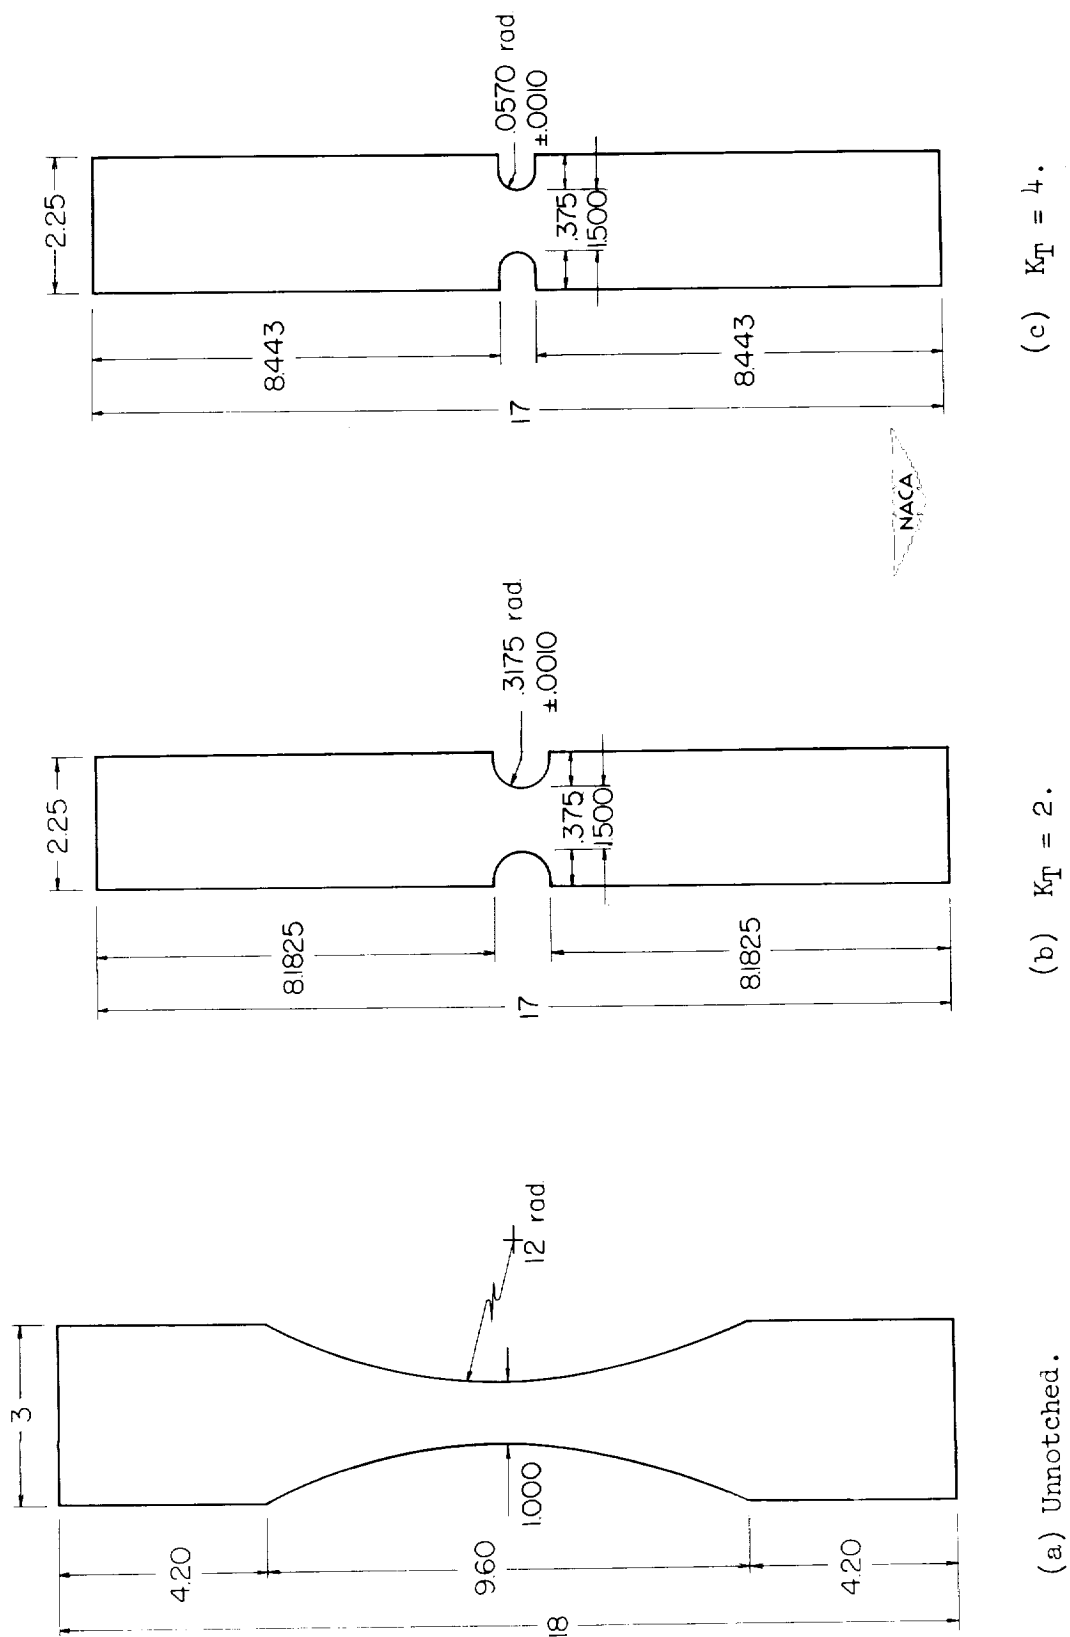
Specimen configurations. (All dimensions are in inches.)
